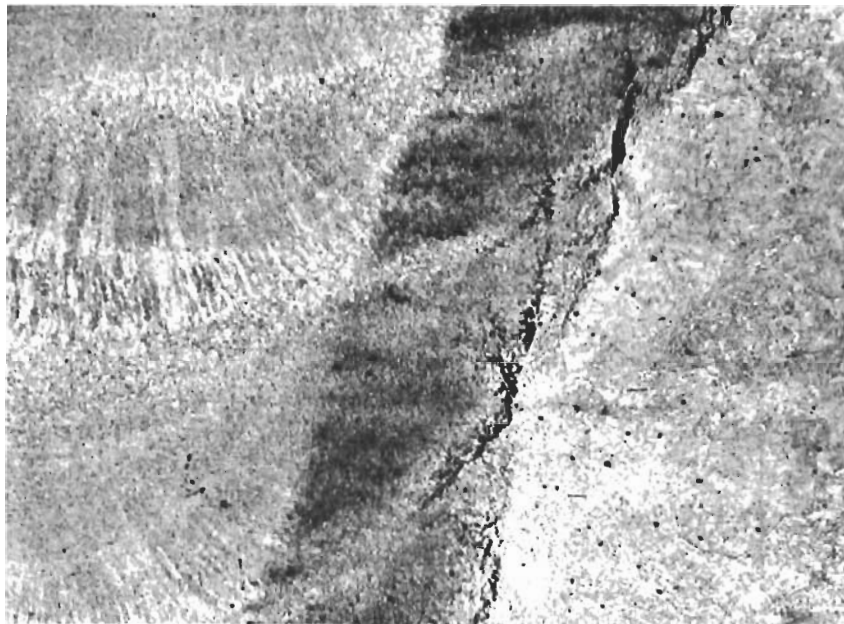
Portion of Welded Joint in Steam Pipe. Weld is at Left; Parent Metal at Right. Graphite has Formed at Low-Temperature Edge of Weld-Heat-Affected Zone
